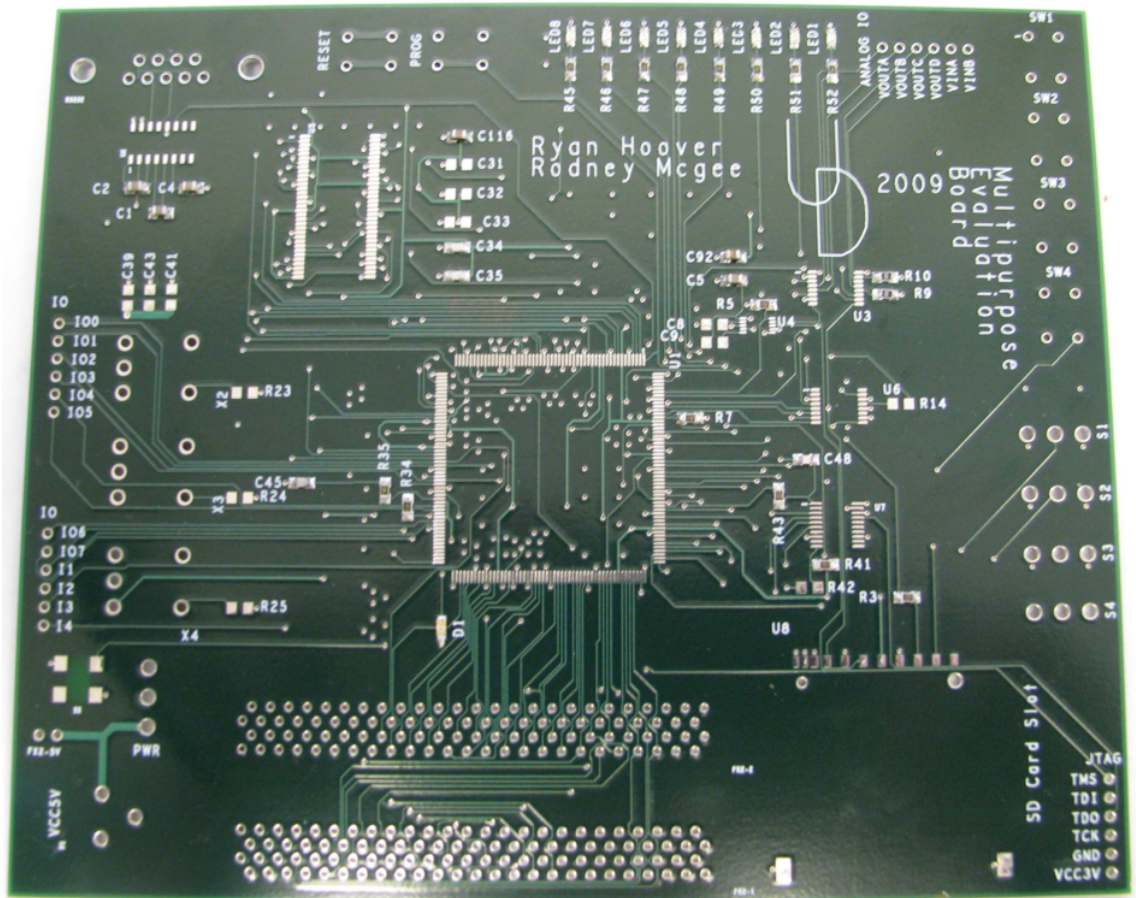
Cadence Early Design With Only Small SMT Parts Soldered
